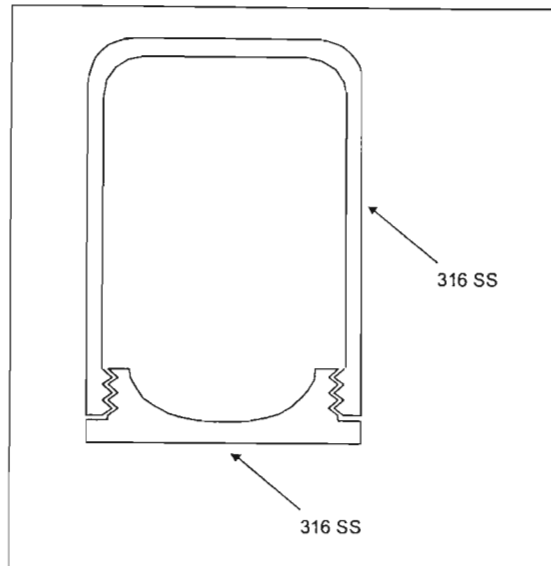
Suggested modification to eradicate the flanges in the reboiler and equilibrium chamber.
